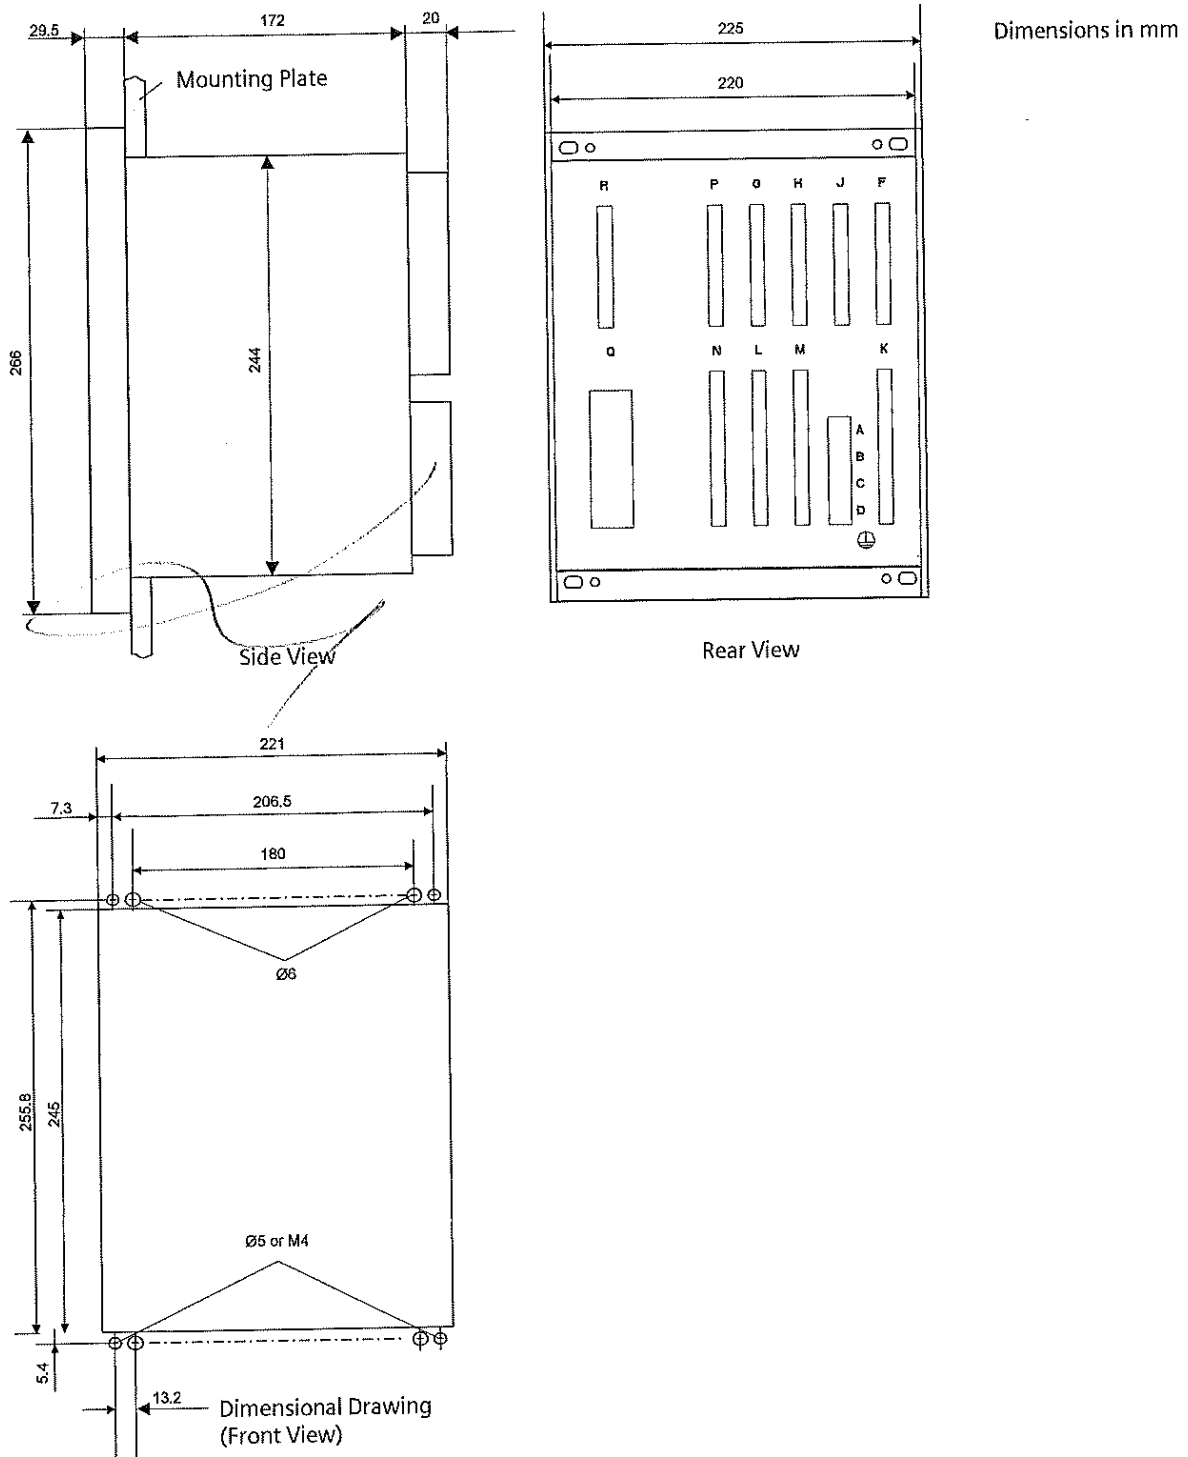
Dimensional drawing of a SIPROTEC 7SJ66 (housing size 1/2)
